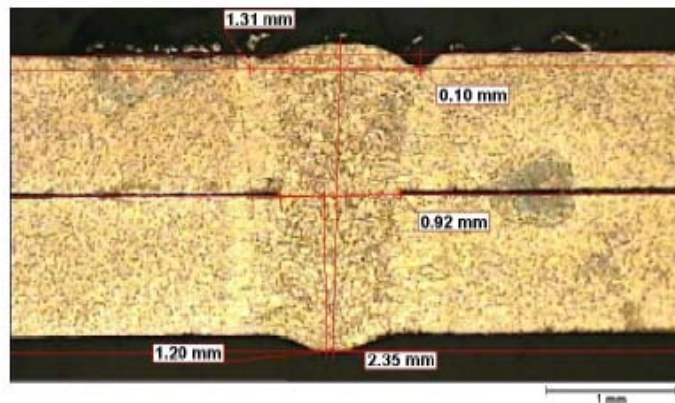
Microsection: remote fibre laser weld in an overlap joint: 1.2mm to 1.2mm DC05.
